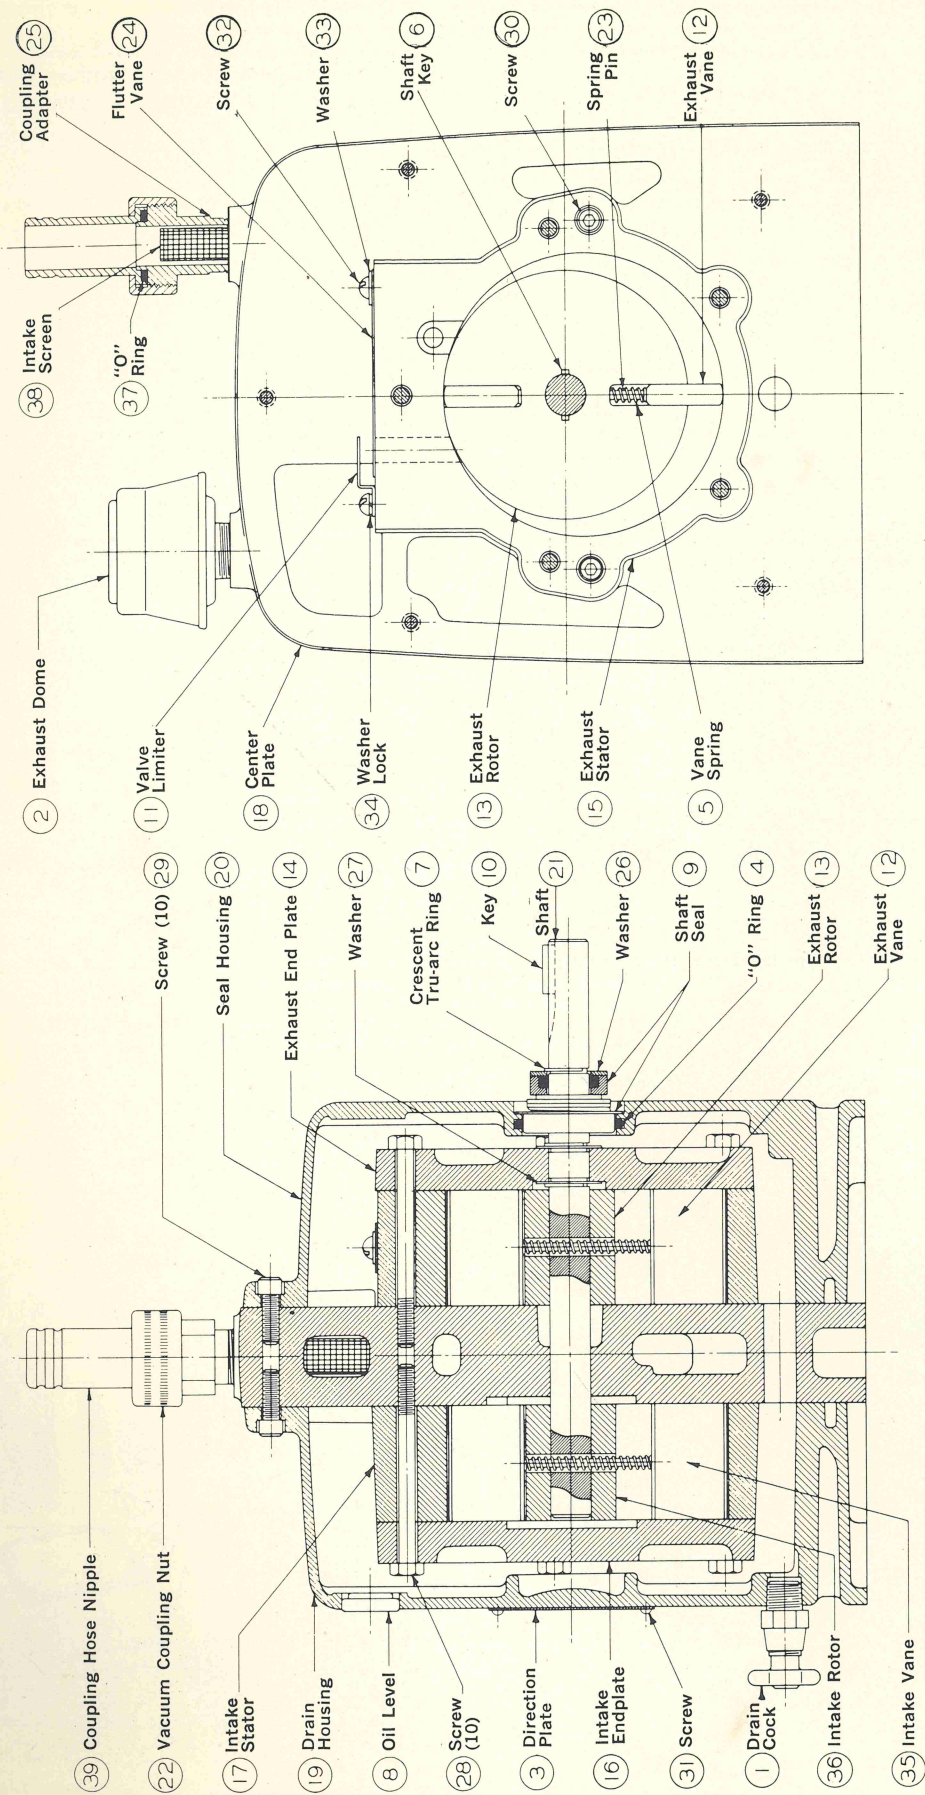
Sectional view of the Hyvac 2, 4, 6, 7, and 14 Pumps
